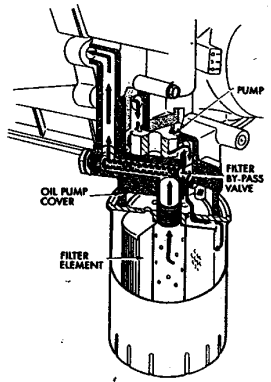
Full flow filtration filters all the oil pumped to the working parts of the engine.
